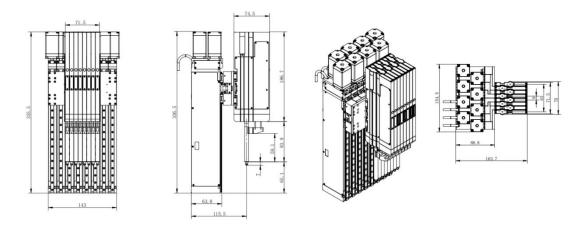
SP13-HSZ 8-Unit Assembly Dimensional Drawing
